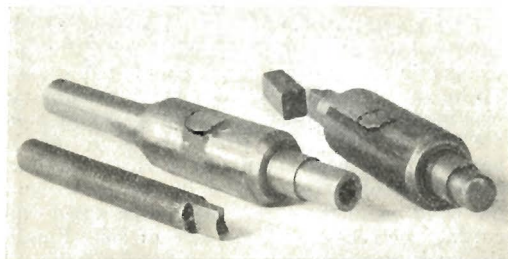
Right to left: The Fractured Arbor, the New Steel Arbor with Finished Hook and Pivots, and the Slotting Mill used.
